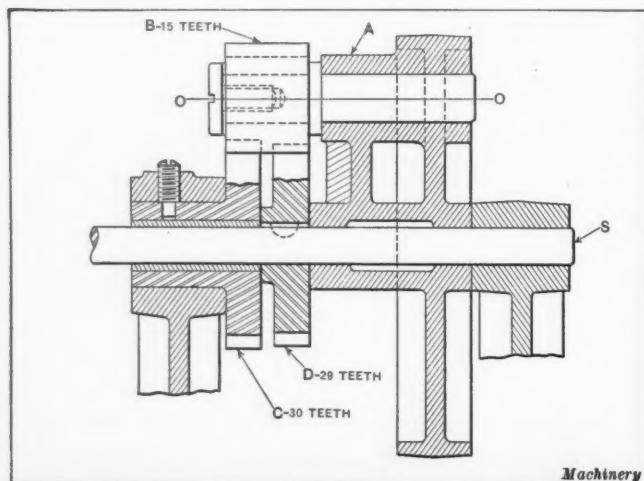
Epicyclic Gear consisting of Two Central Gears (One stationary) and Arm which carries Wide Faced Planetary Gear
